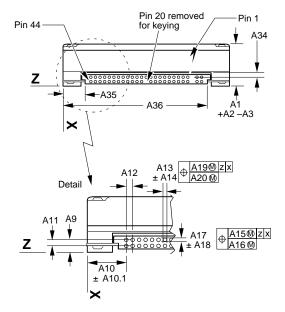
Drive mounting dimensions—end view (for dimension specifications, see table below).
